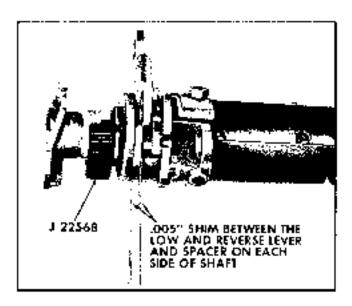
Adjusting Lower Shift Lover Clearance
